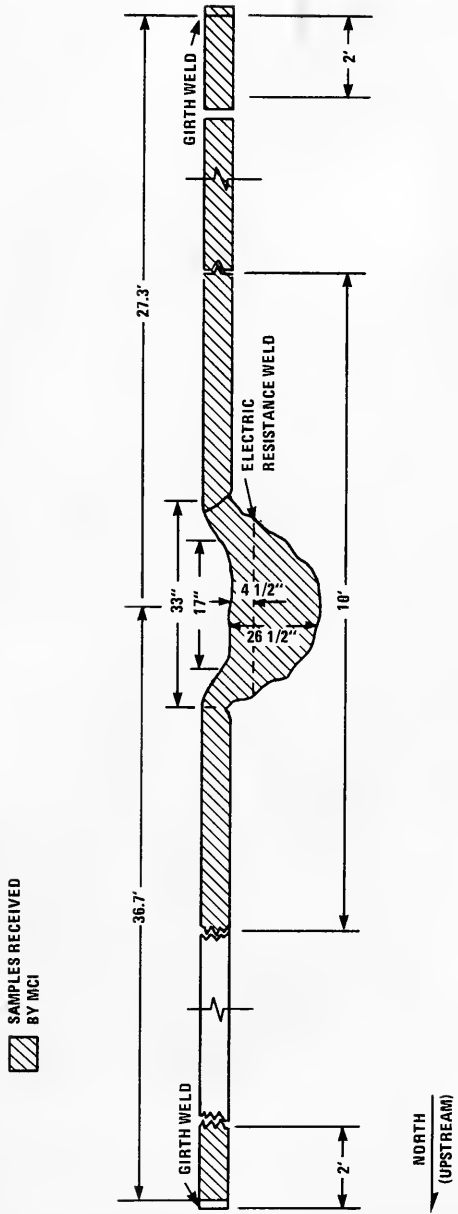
An 8-inch segment of pipe containing the 3-foot ruptured section.
